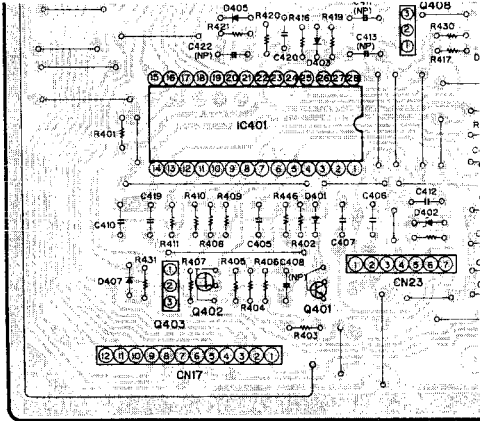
PM4001 and peripheral circuits on SRVB assembly
